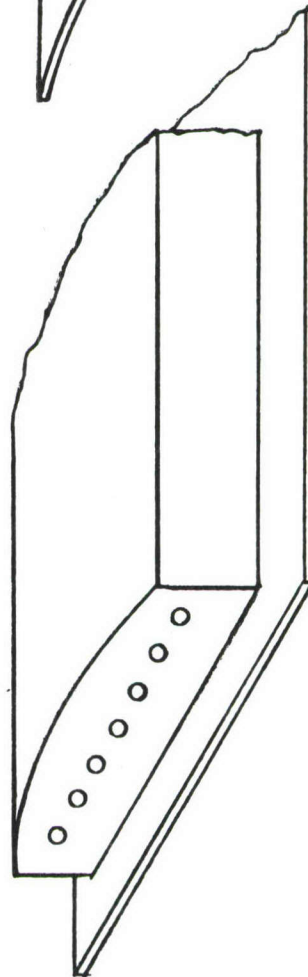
Basic Manufacture Spar Details Front and Rear Spars
